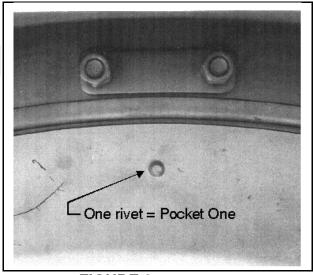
(MSOP0239BE) Rivet(s) Used To Identify Pockets
